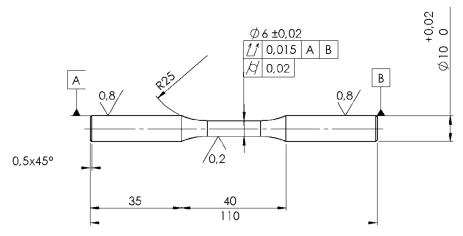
Technical drawing of the sample for fatigue tests under rotating bending (all dimensions in mm)
